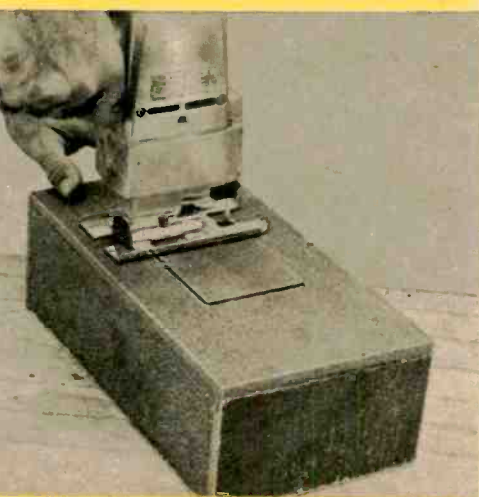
After the resin has cured, cut an opening for speaker, using saber saw with metal-cutting blade. Install grille cloth from rear.
